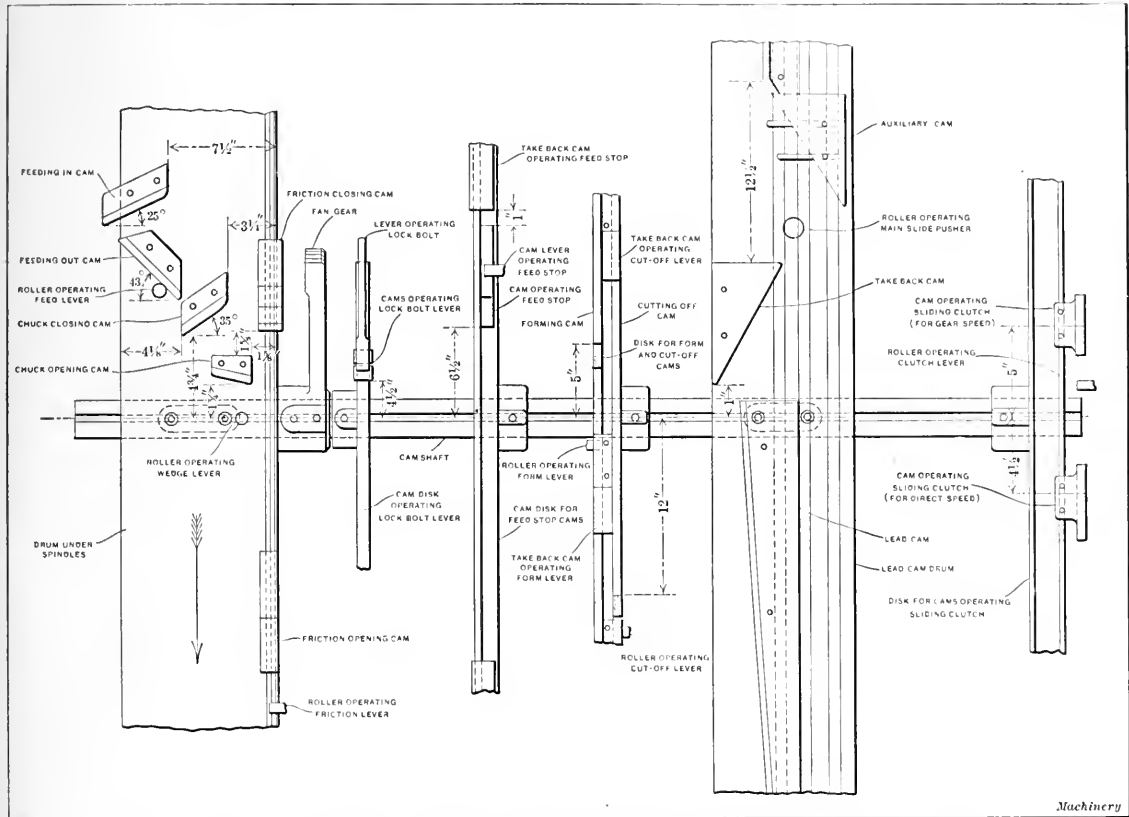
Developed Plan View of Main Cam-shaft on Nos. 54 and 55 Machines showing Position of Cams and Operating Mechanism when Machine is indexing
